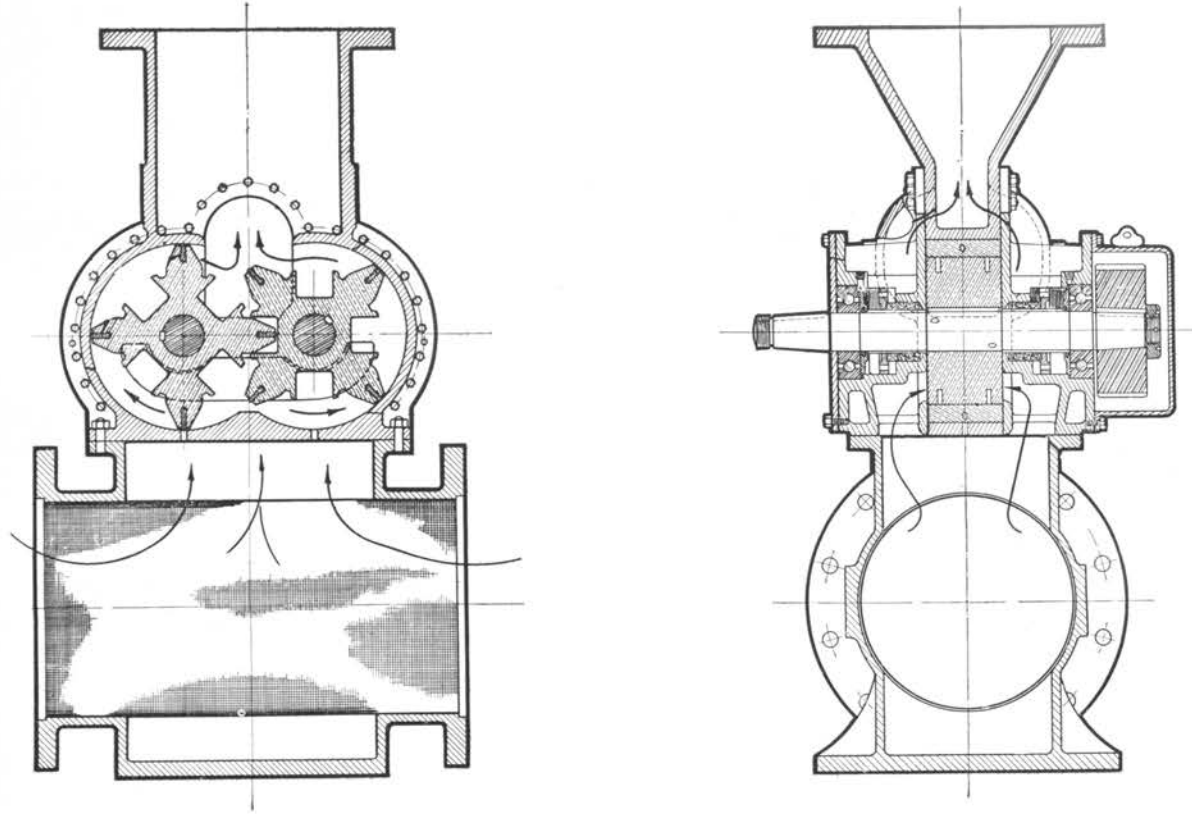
Cross sections of pump showing rotors, packing strips, ball bearings, stuffing boxes, and external pilot gears.
